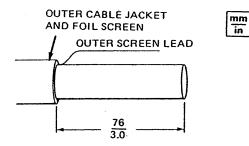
Outer Jacket of Signal Cable Stripped Back for Connection to Transmitter Terminals
